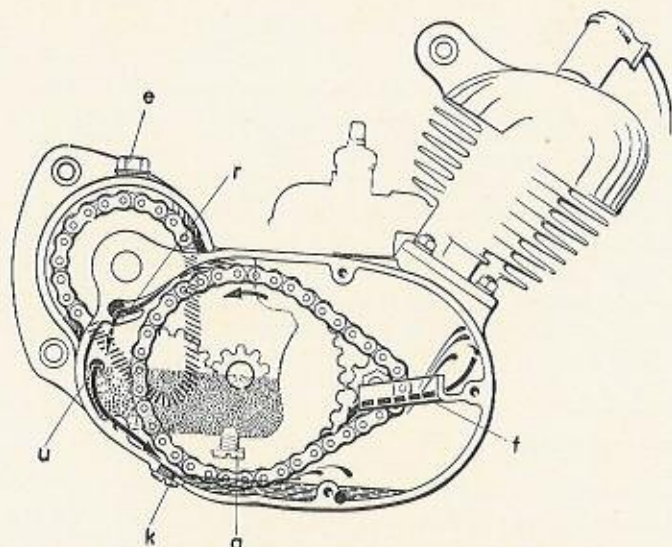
Oil Circulation in Clutch Chamber and Gearbox.
